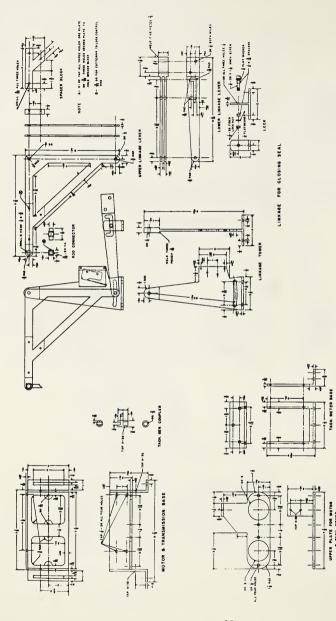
Auger dispenser drawing No. 3, linkage and motor mount components.
